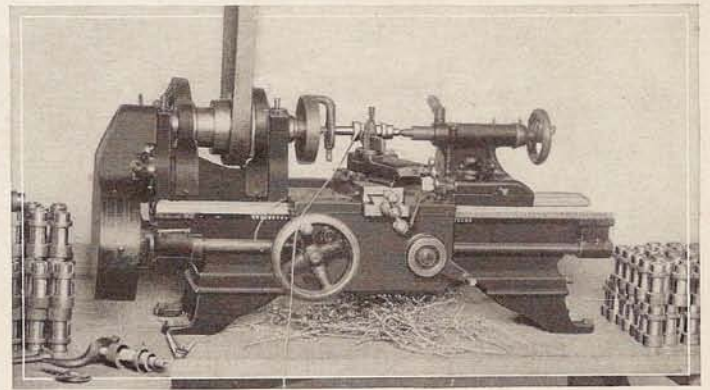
Manufacturing Small Duplicate Parts in Quantity on a No. 22—9-inch Junior South Bend Lathe
